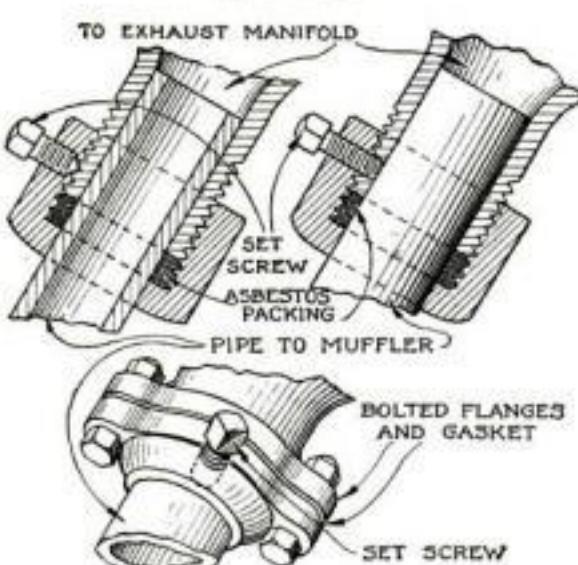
Set screw in exhaust pipe manifold union holds it tight and stops escape of gas.
